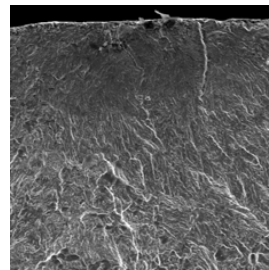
Fracture surface. Shot peened base metal.
